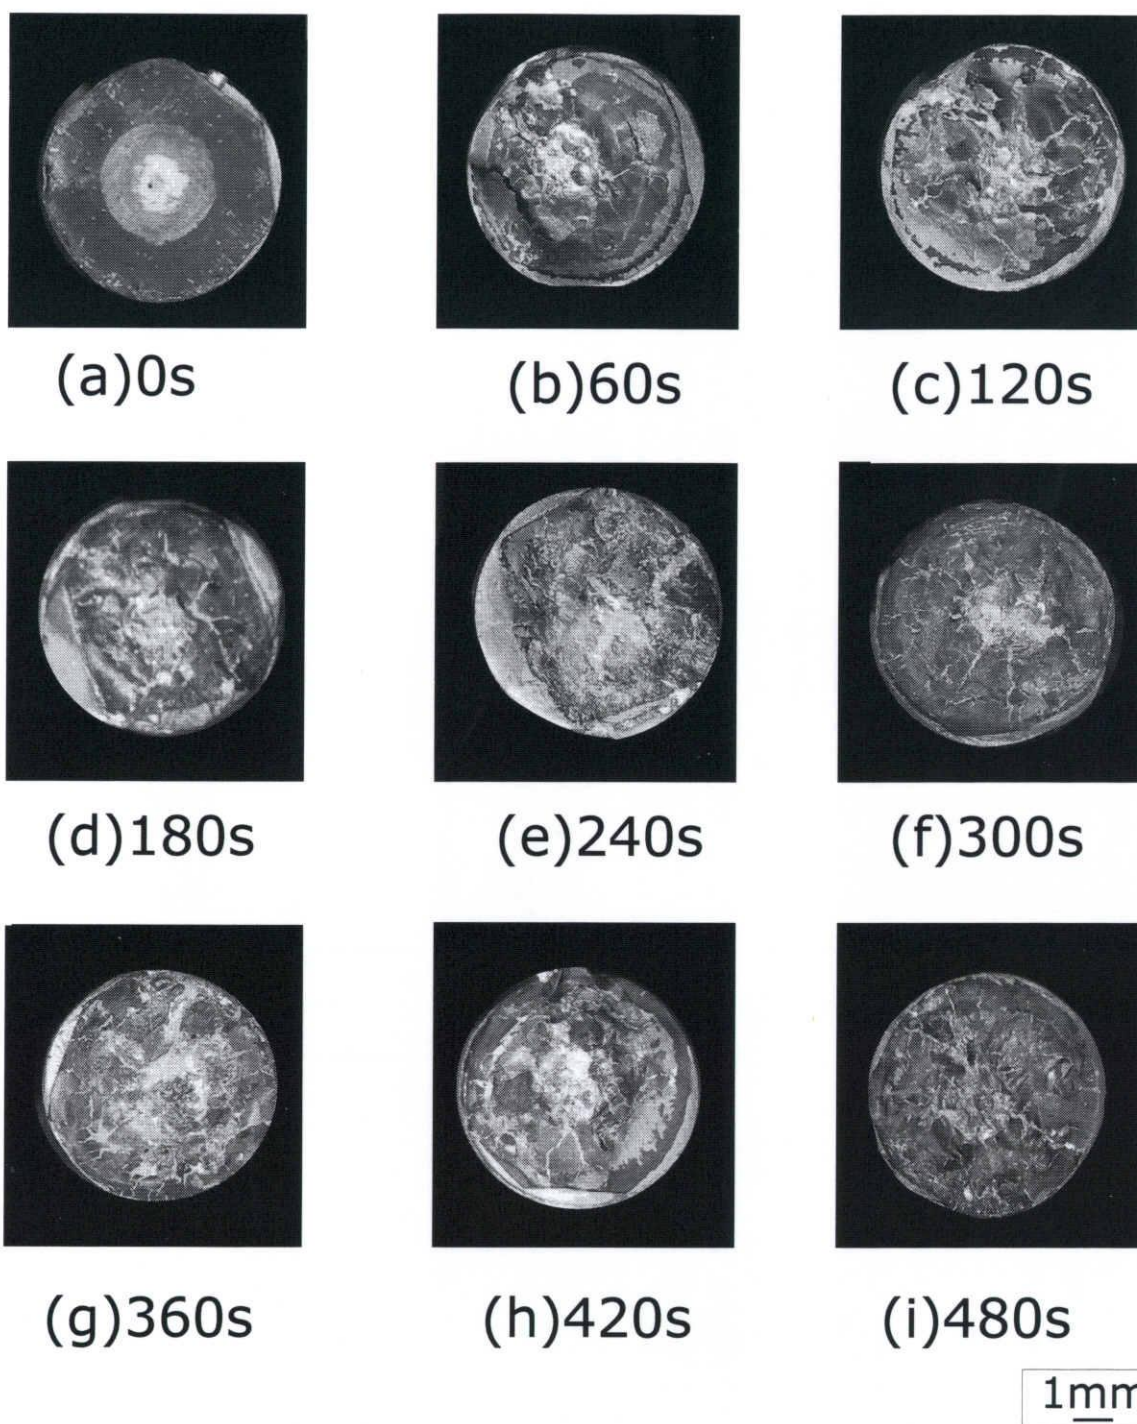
Fracture surface of specimen by Al/Cu/Al;
